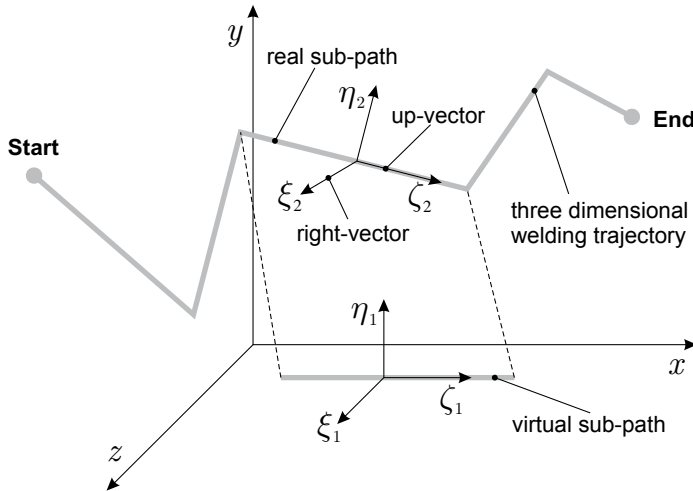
Movement on a three dimensional welding trajectory
